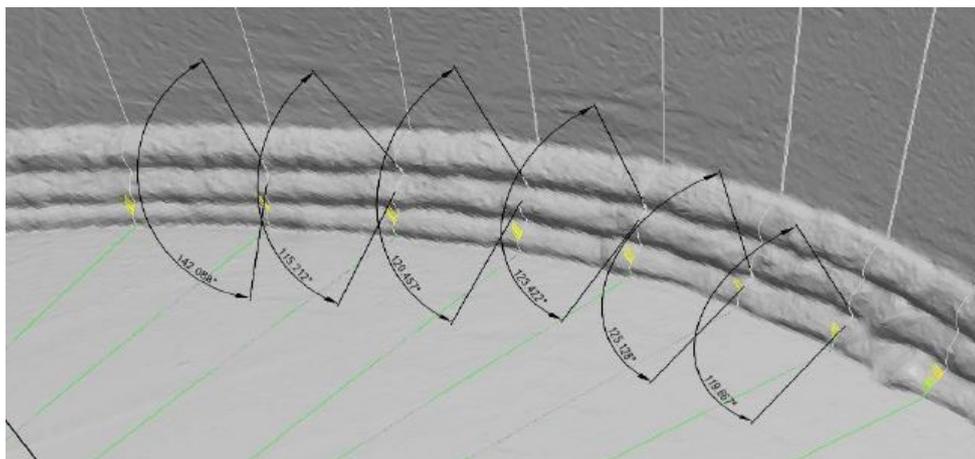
Weld angle between Cap Weld run to check possible Stress Concentration Factors (SCF)
